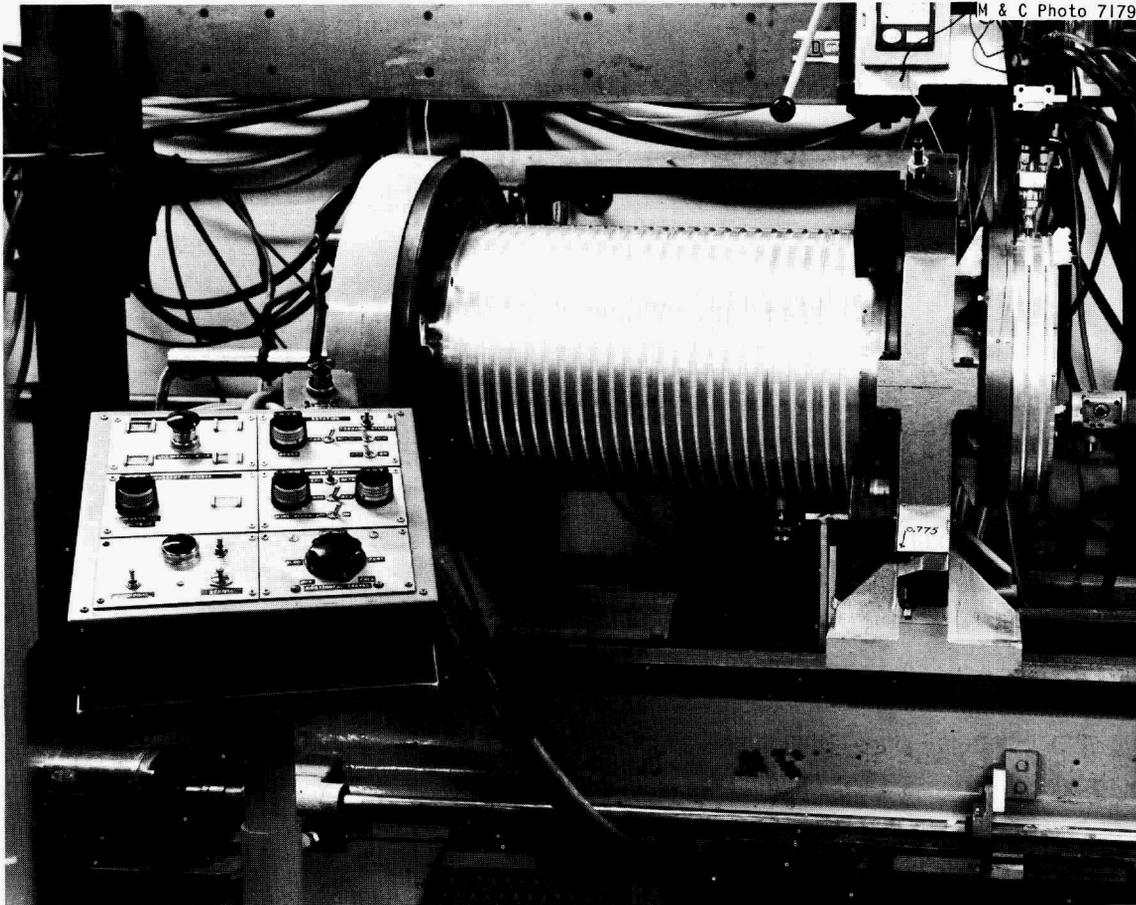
Outer Fuel Element with Circular Weld-Test Assembly.
